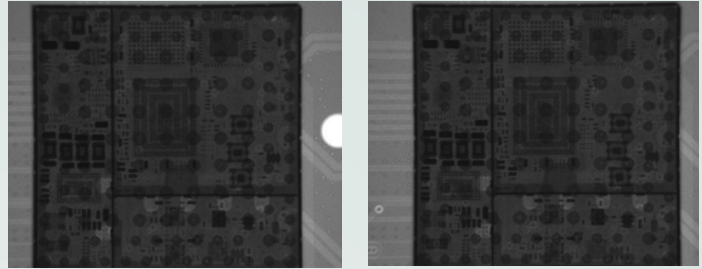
Voiding rate is 6-14 % with solder preforms replacing solder paste for LGA component soldering.
